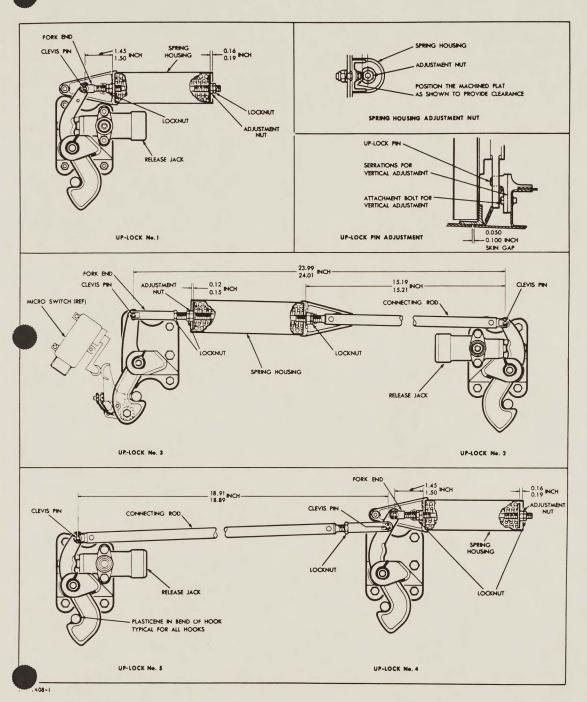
WHEEL DOOR UP-LOCK ADJUSTMENT
